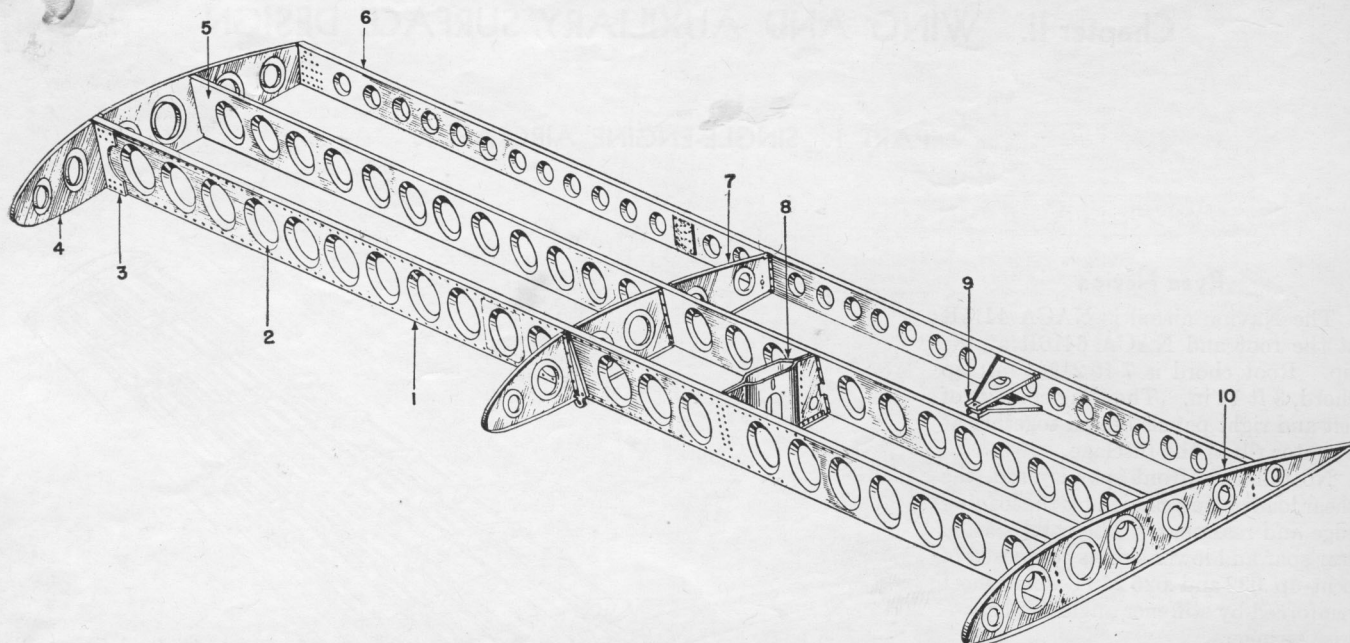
Simplified wing structure: (1) front spar; (2) 45-deg simple flanged lightening hole; (3) bearing plate for attachment of the front spar to the cabin; (4) two-piece inboard end rib; (5) middle spar; (6) rear spar; (7) center rib, intercostal between spars; (8) wing float socket; (9) aileron bell-crank bracket; (10) outboard end rib with wide flange for attachment of the wing tip.
